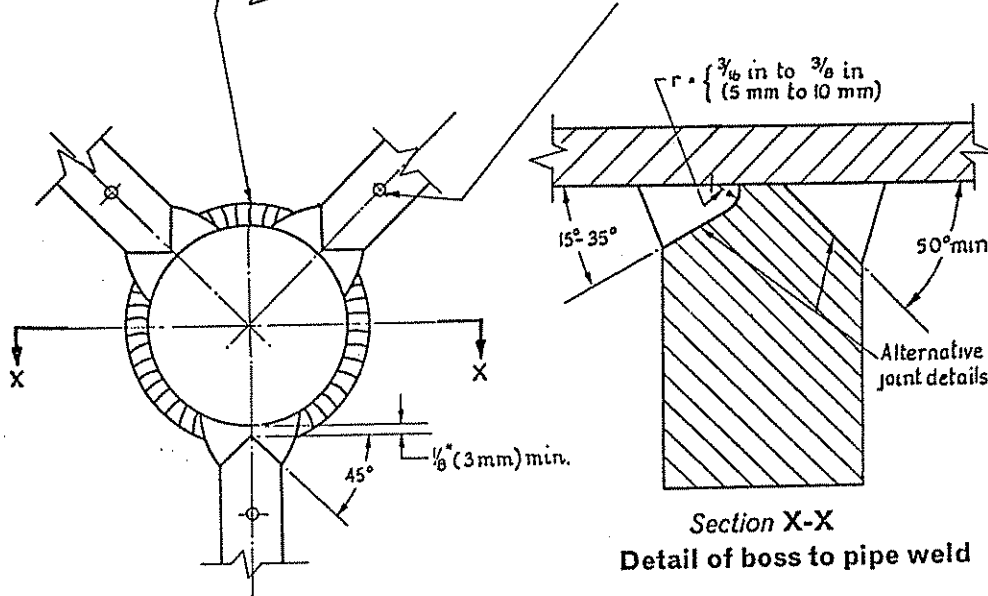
Detail of reinforcement to boss weld
